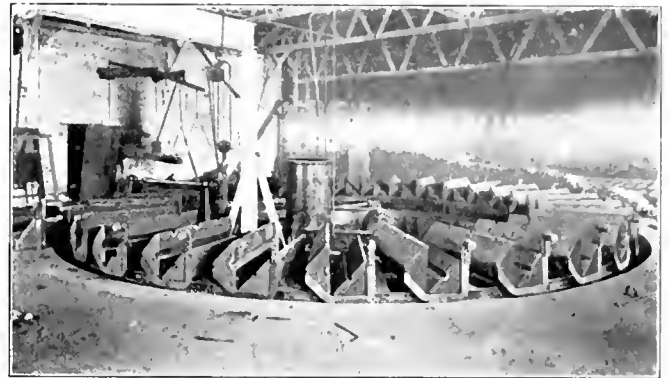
General View of Machine for Casting Pipe in Permanent Molds.
